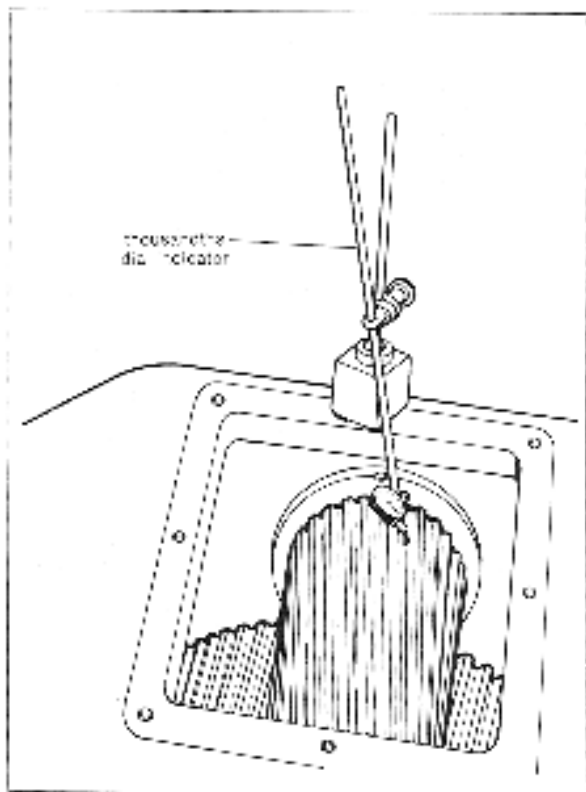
Checking 'Backlash' with Thousandths Dial Indicator.
